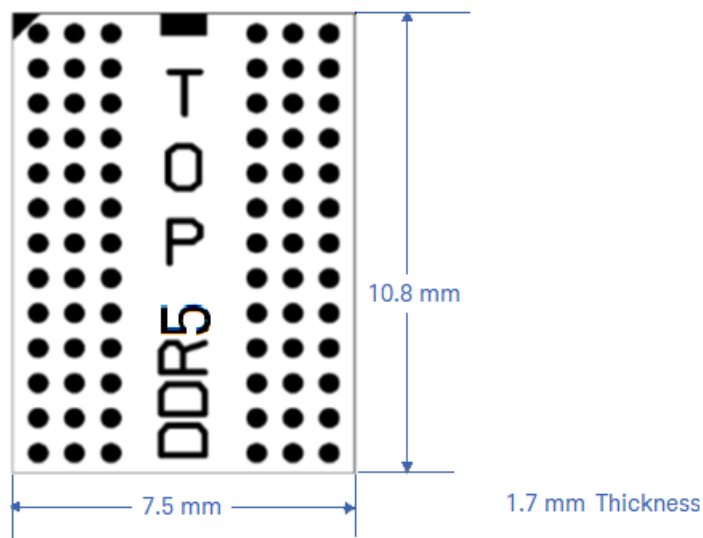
Dimensions of a W5643A interposer (TOP VIEW)
